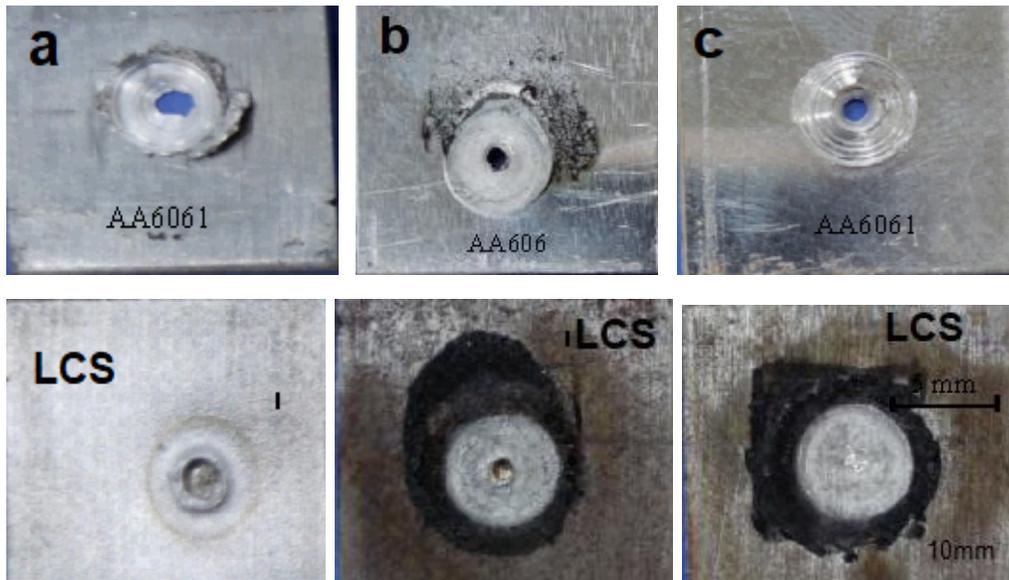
Examples of typical joint failure mode, showing upper and lower sheets of the fractured lap-shear test samples produced using 1600 rpm tool rotation rate and 3.0 s welding time (a) without interlayer (b) with an interlayer containing 0.001 g Zr; and (c) with an interlayer containing 0.005 g
